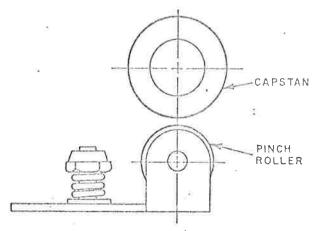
Pinch Roller/Capstan Centerline Adjustment
